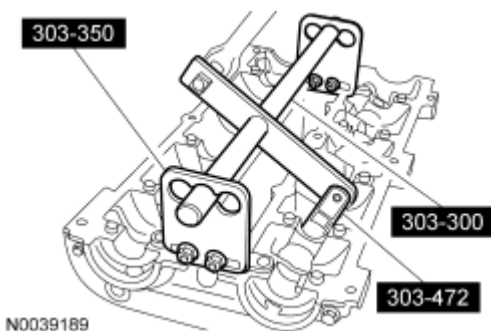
Compressing Valve Spring Using Special Tools (303-300, 303-350, 303-472)
